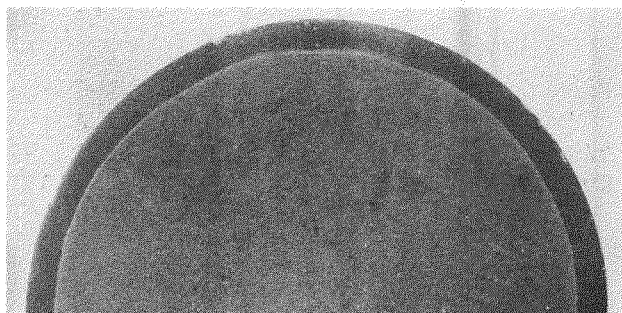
Core-to-clad interface in the coextruded rod. Zircaloy-2 at top of picture; U - 2^{W/o} Zr core at bottom. Extrusion billet cores were from small, eight-cavity molds and were heat treated for 30 minutes at 780°C and air cooled. Number of repetitions is listed under illustrations.
